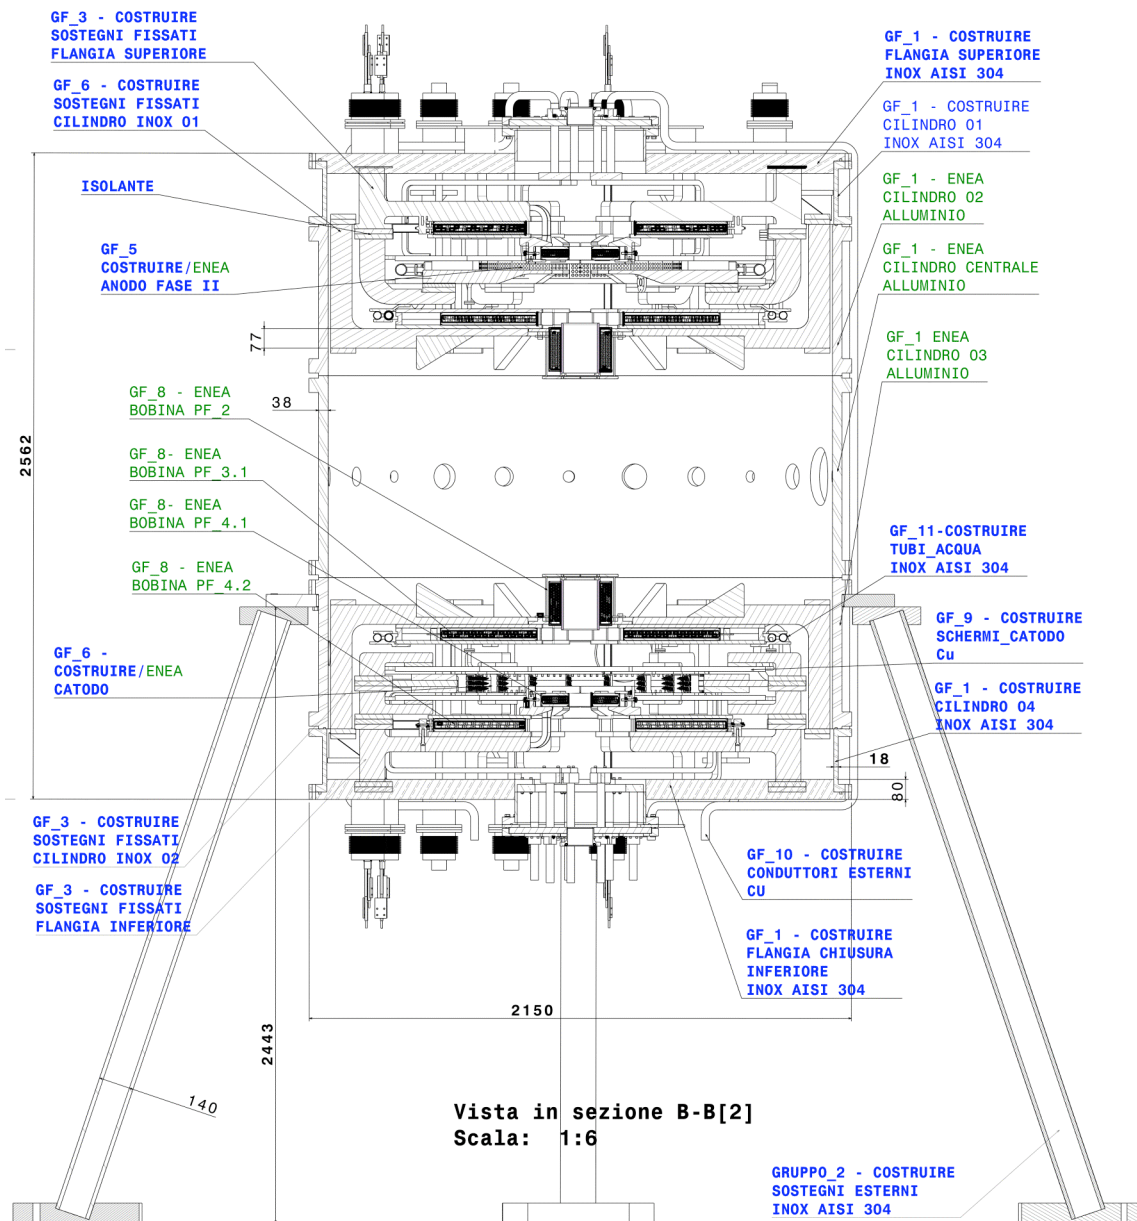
2D section of the MULTI-PINCH load assembly.
